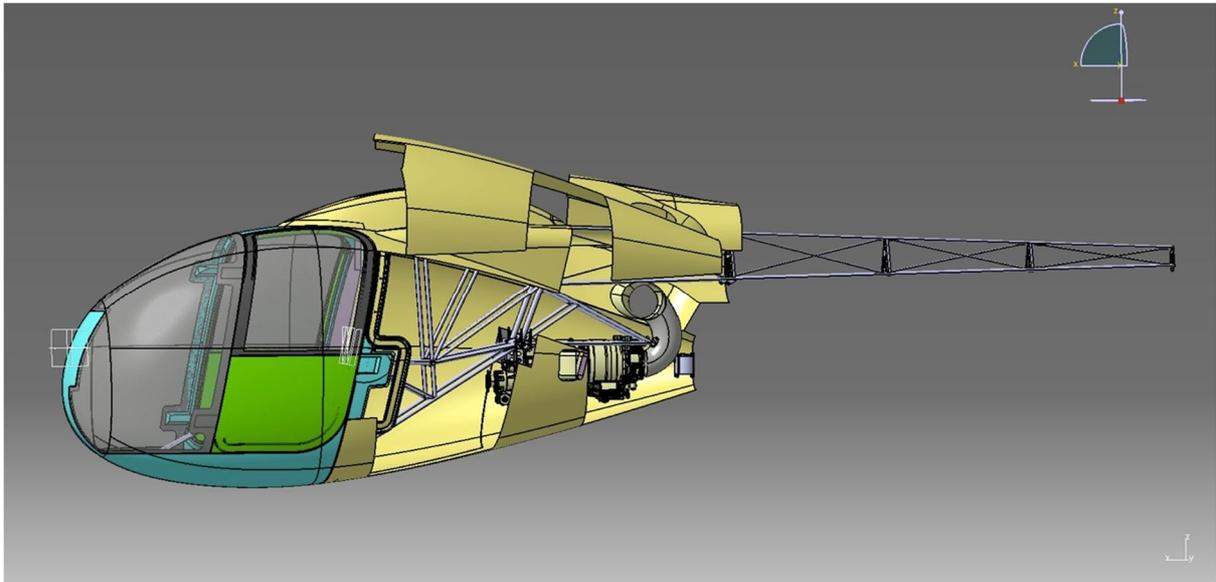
B250 engine support structure with trussed tail boom and open fuselage (with access doors)
